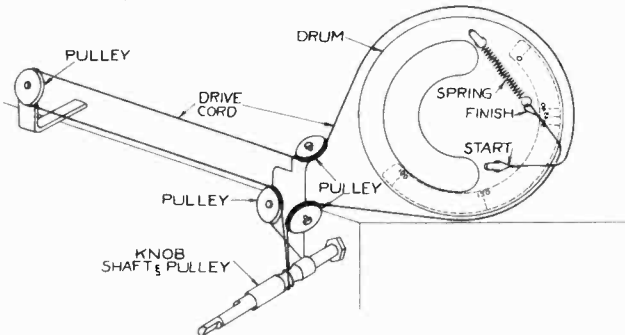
CONDENSER AND INDICATOR DRIVE CORD
